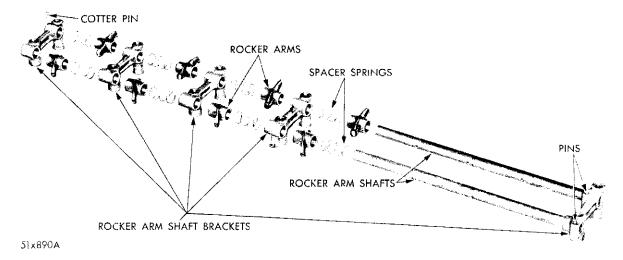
Rocker Shaft Assembly (Disassembled View) (FirePower)
